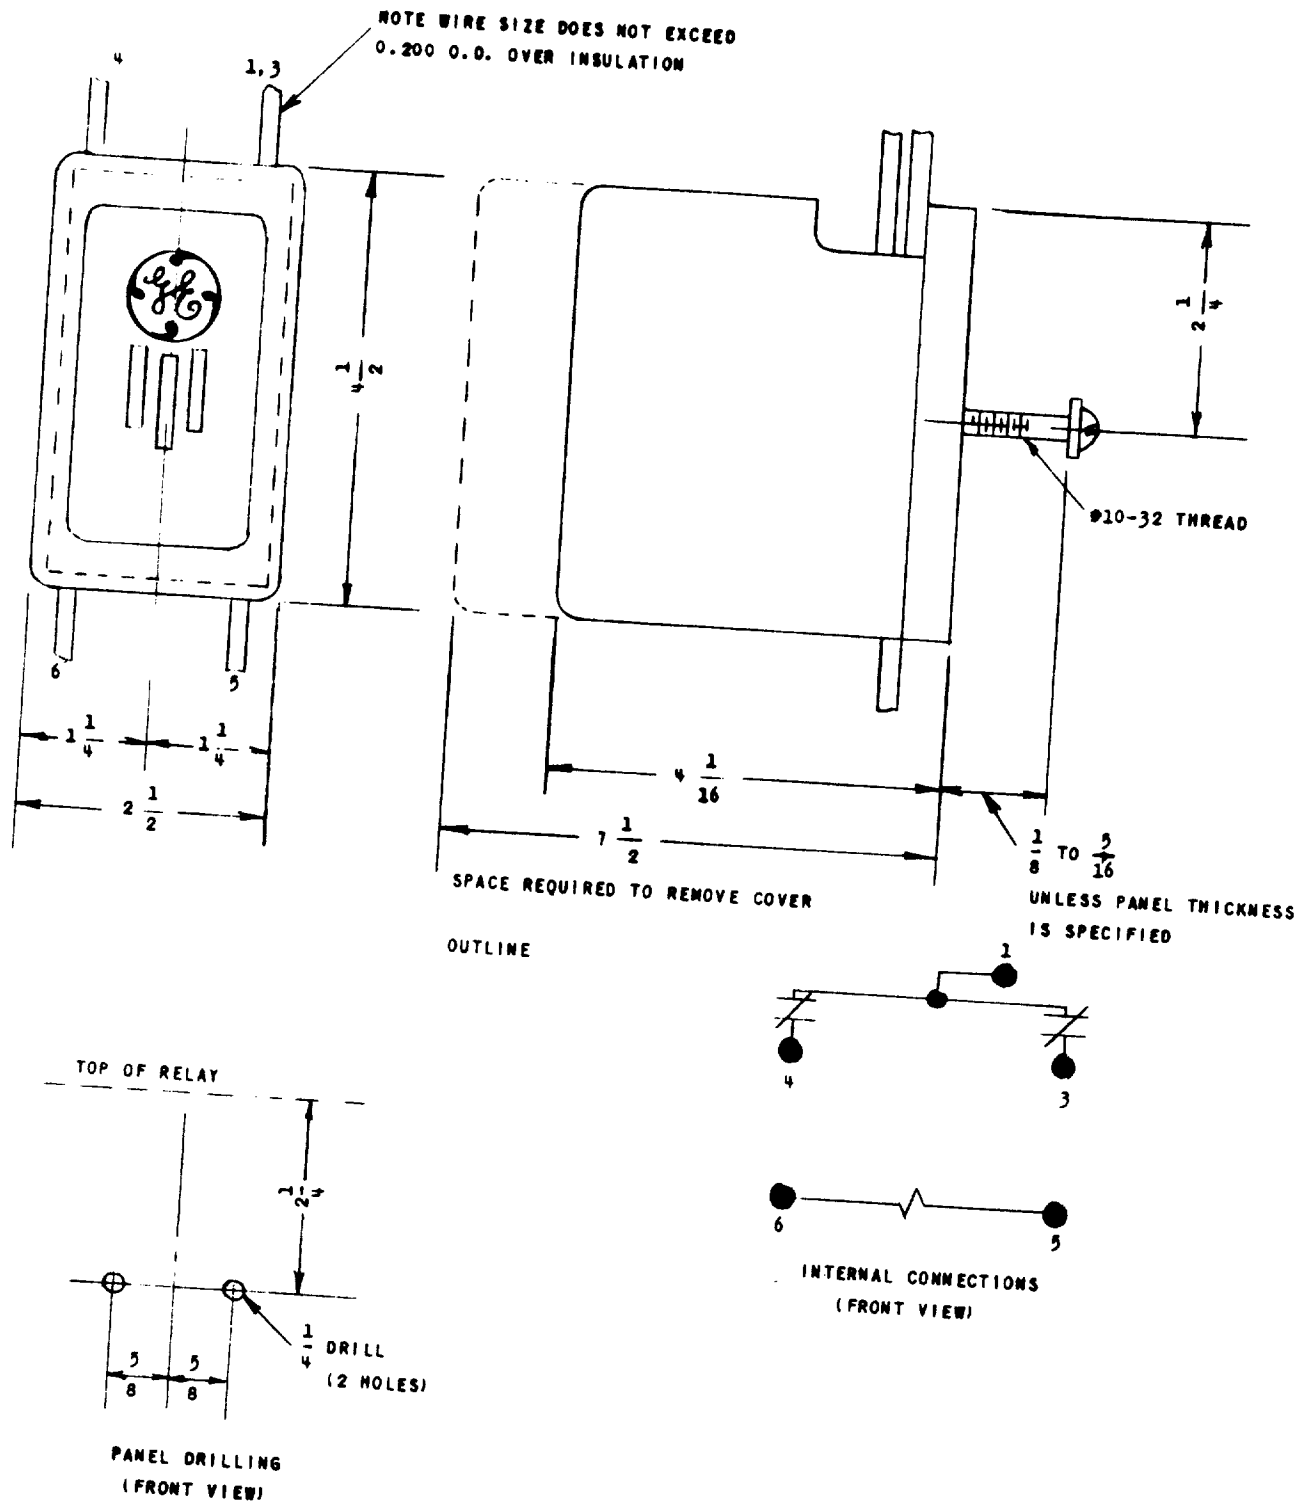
Internal Connections and Outline & Panel Drilling Dimensions for Relay Types HGA26A & HGA26B.
